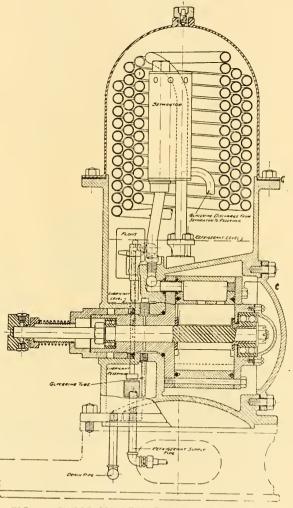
WILLIAMS REFRIGERATING MACHINE.
